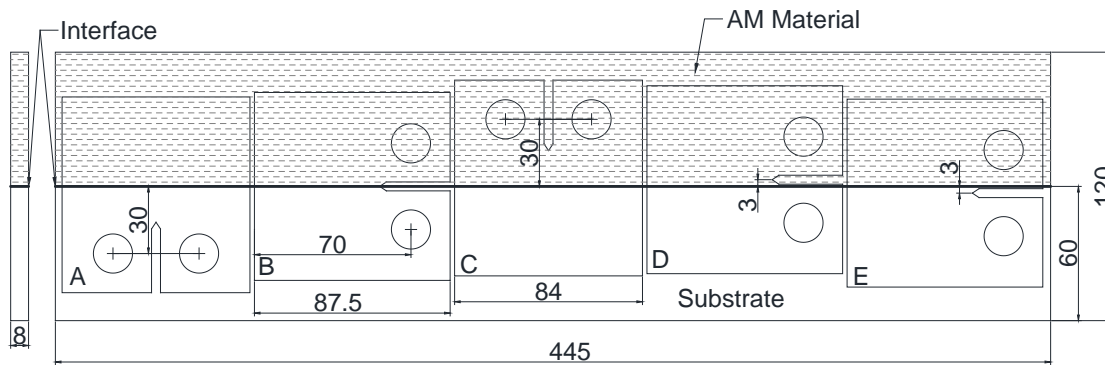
Position of C(T) specimens for fatigue crack growth rate testing, Type A to E, in Wall-Bi120 (C(T) thickness = 6 mm)
